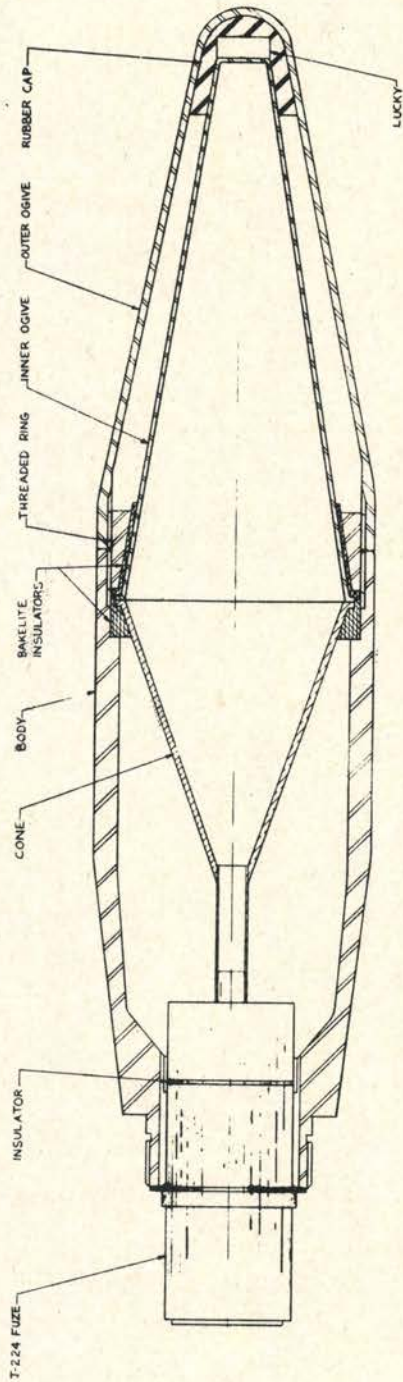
T224 Plug-in Fuze assembly for T188 HEAT shell.
